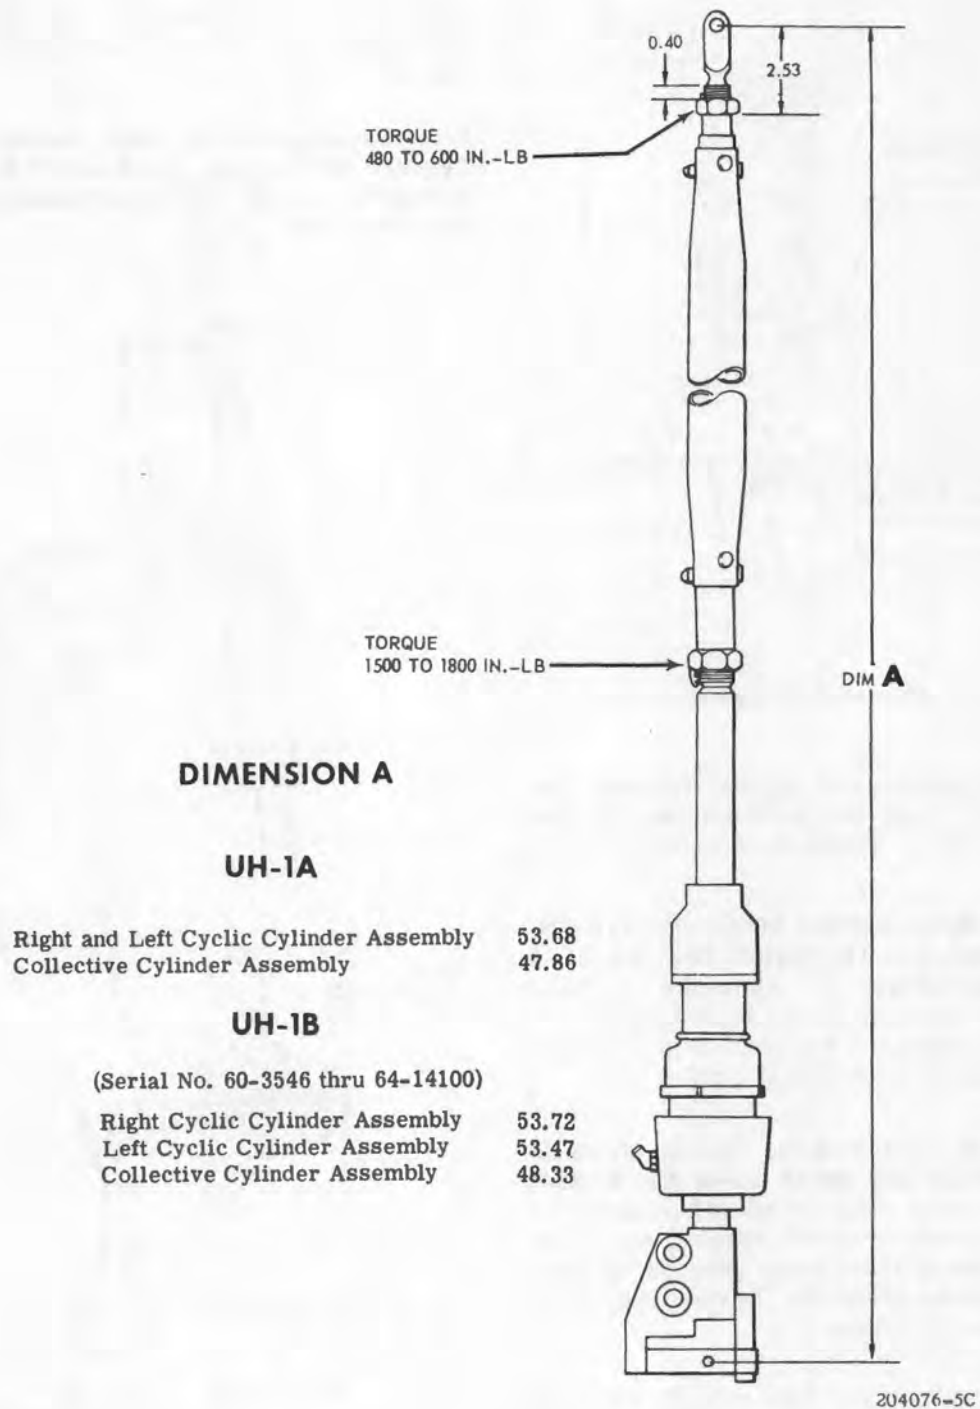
Cylinder assembly dimensions (UH-1A and UH-1B serial no. 60-3546 thru 64-14100)
